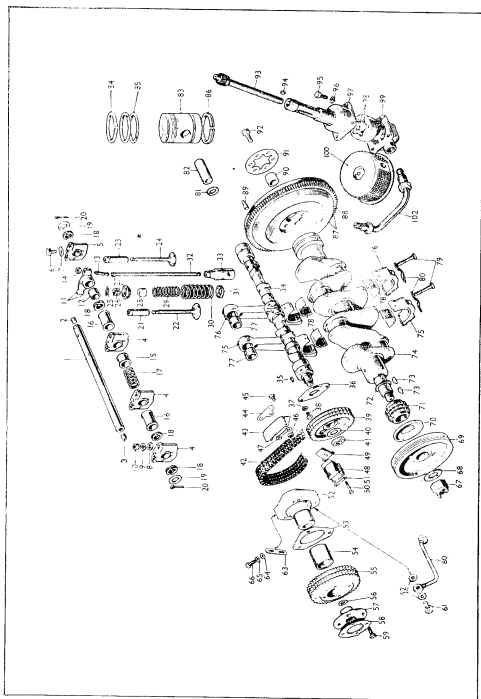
2.5 LITRE DIESEL CRANKSHAFT - CAMSHAFT ASSEMBLIES
